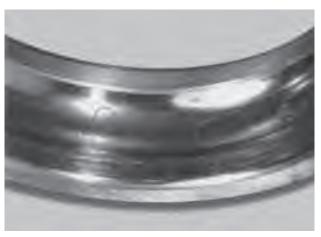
Indentation and Flaking on Outer Ring Raceway of Deep Groove Ball Bearing
